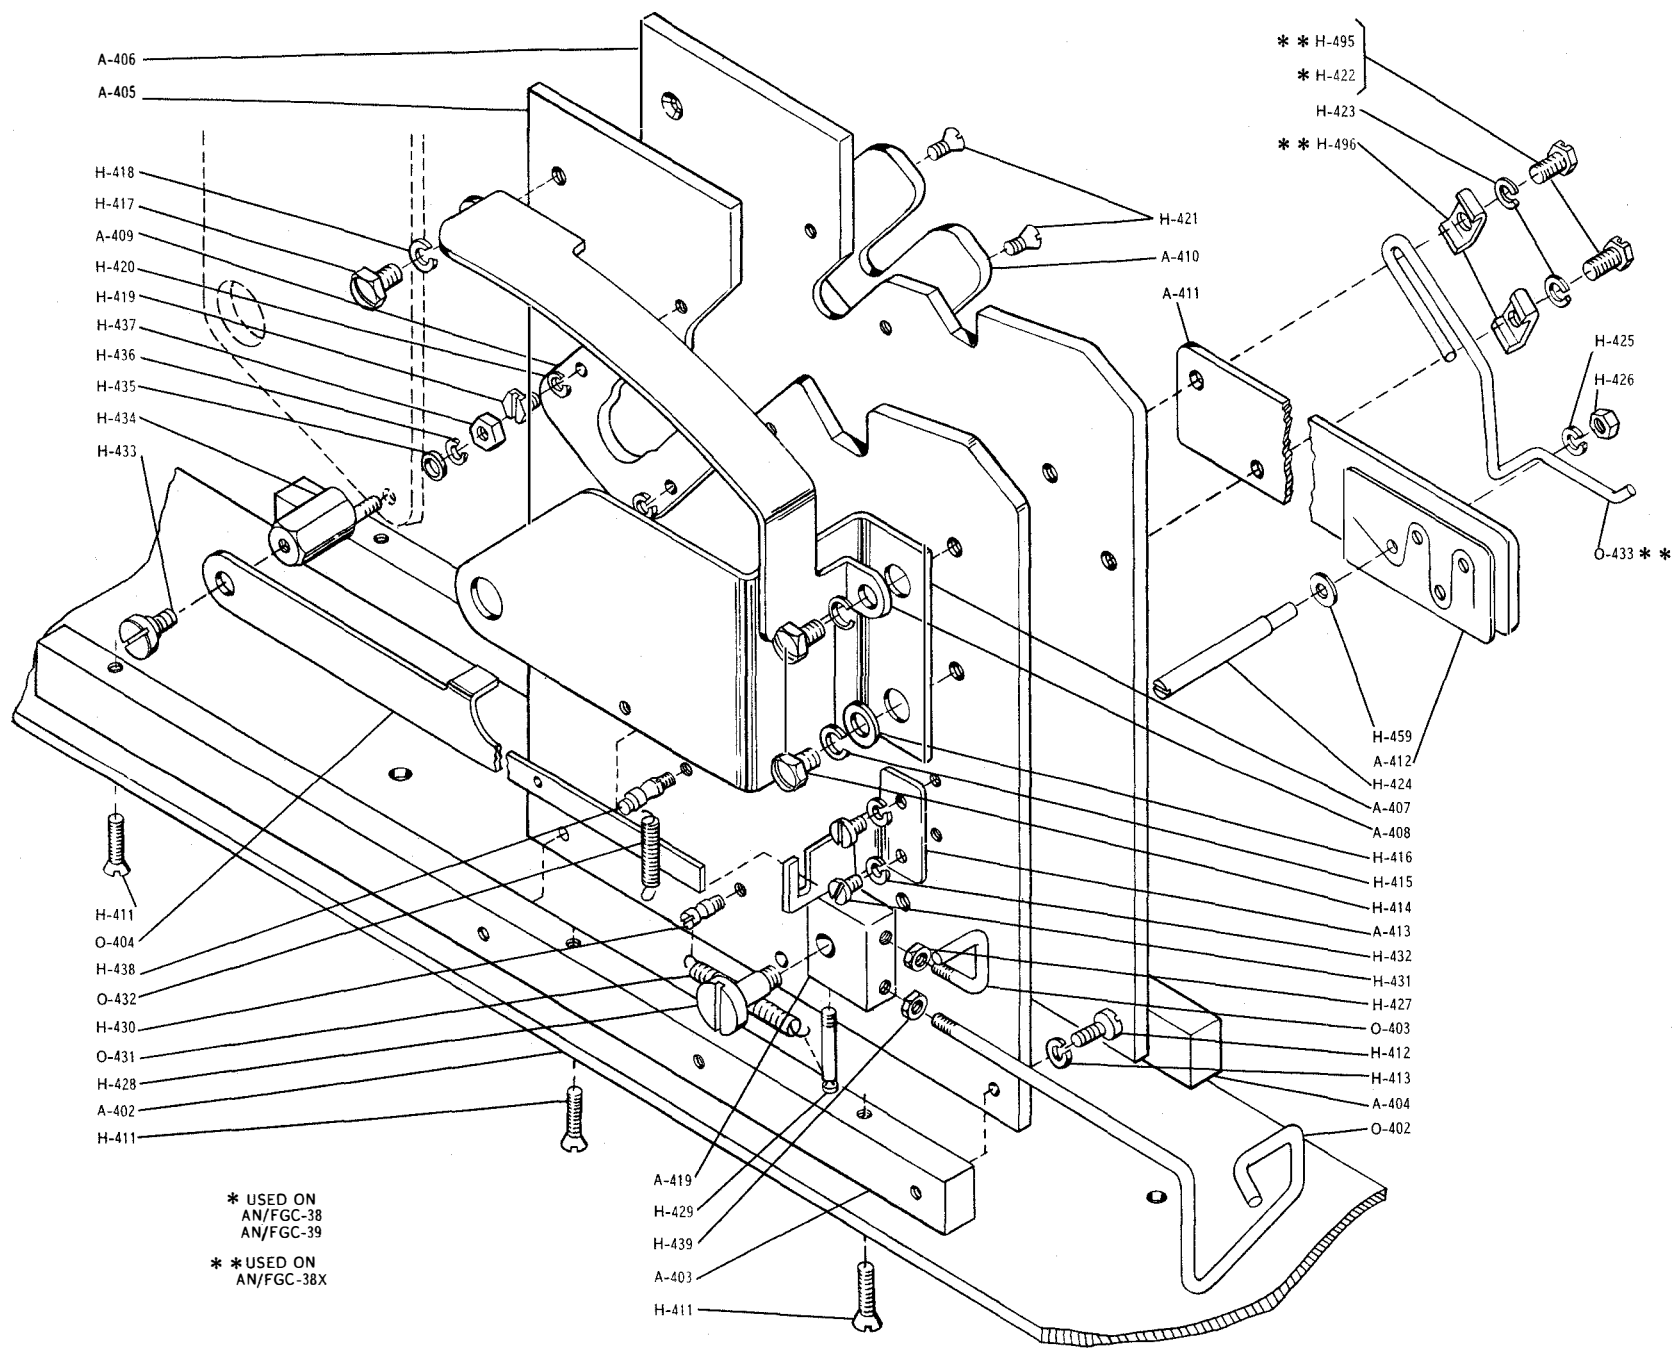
Reeling Machine RL-173/FGC, Base Assembly
